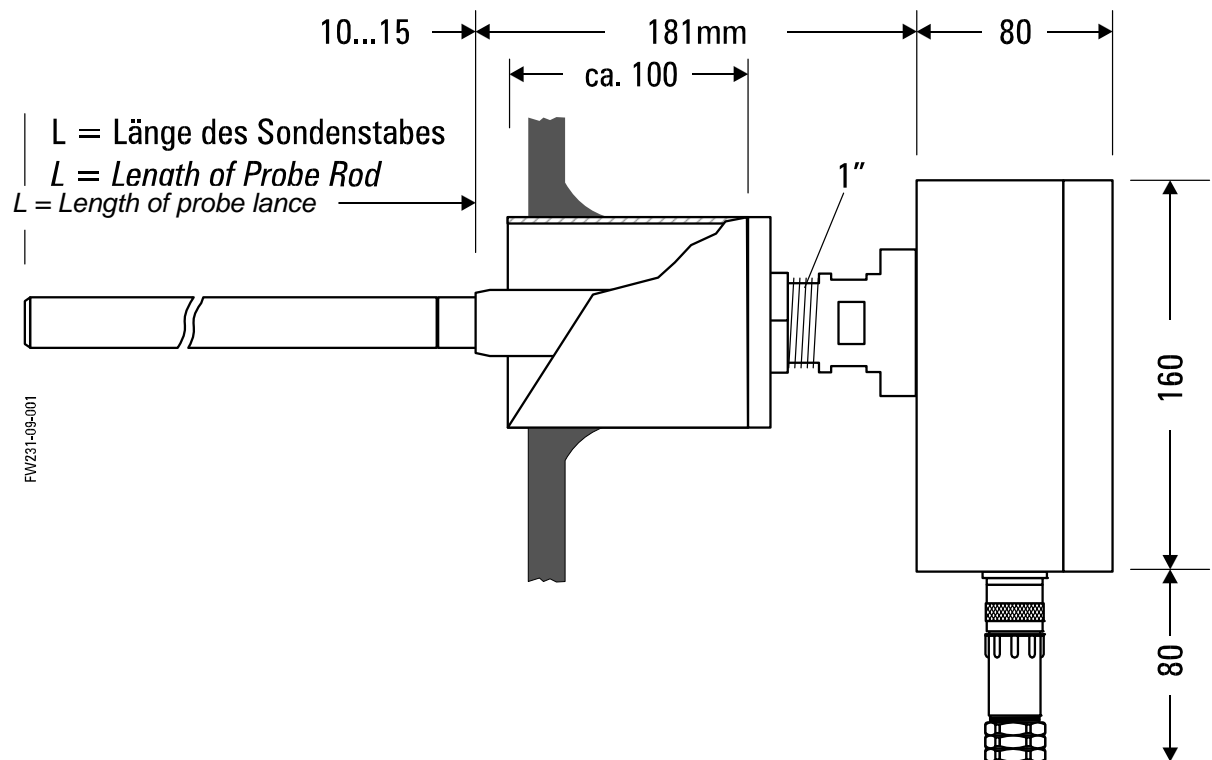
Dimensional drawing of sensor probe with 1" (G1) threading according to DIN ISO 228
